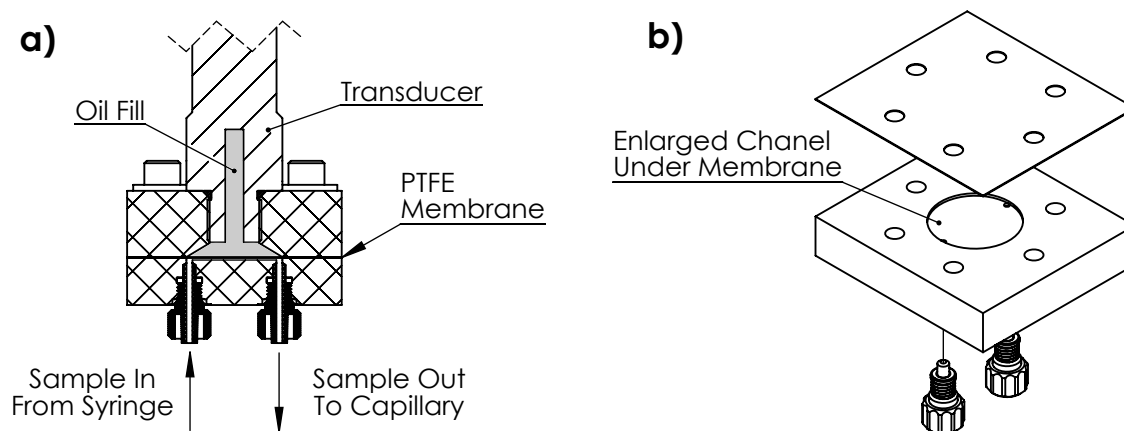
Capillary Rheometer Core Detail: a) Section view showing internal flow; b) Exploded view showing sample side only
